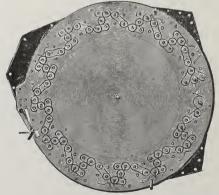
Guide grooves in top plate of machine shown in fig. 9.
